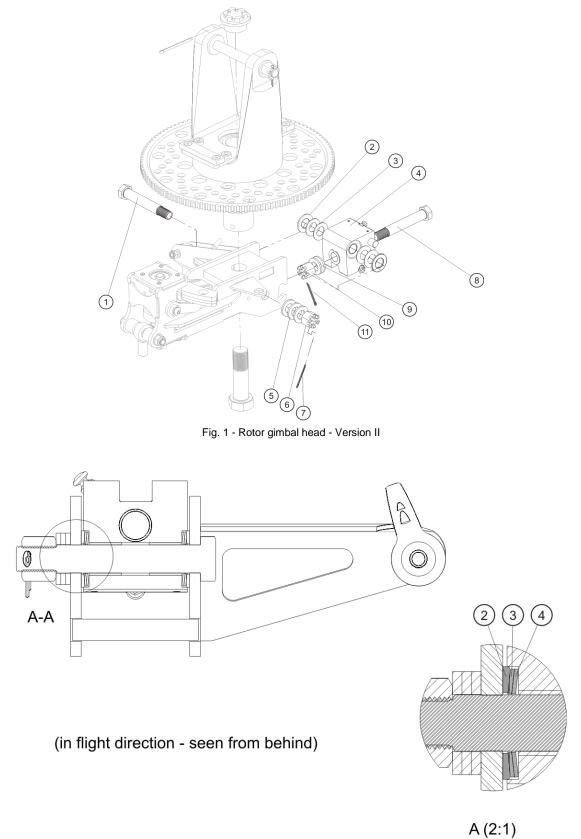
Arrangement of spring washers on gimbal head - Version II
